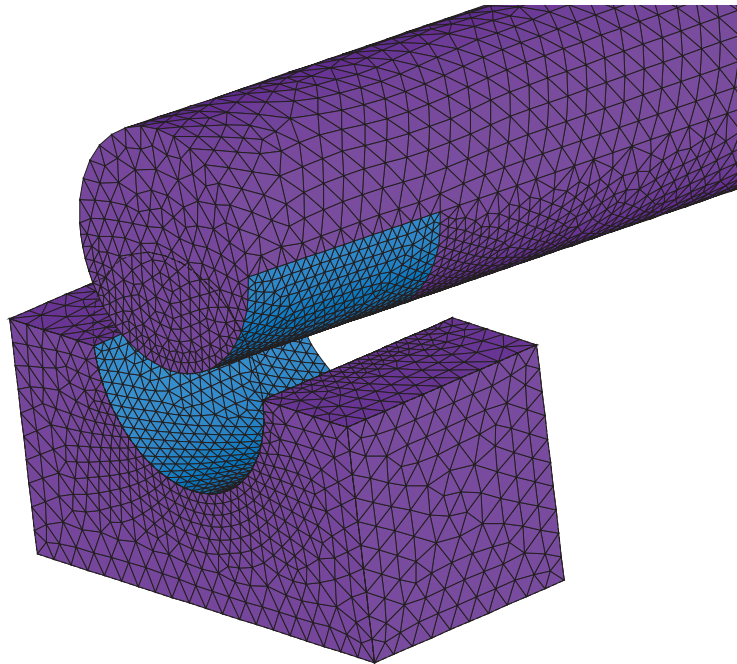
Magnification of partial bearing with shaft shown in its deformed state and also highlighting the bearing area used for the elastohydrodynamic model.
